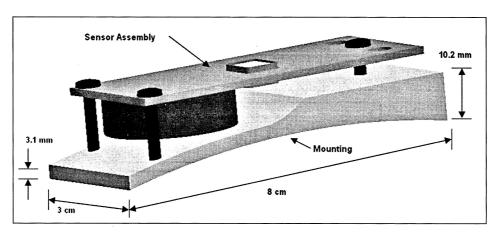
Schematic representation of the TPMS prototype comprising the sensor assembly and mounting
